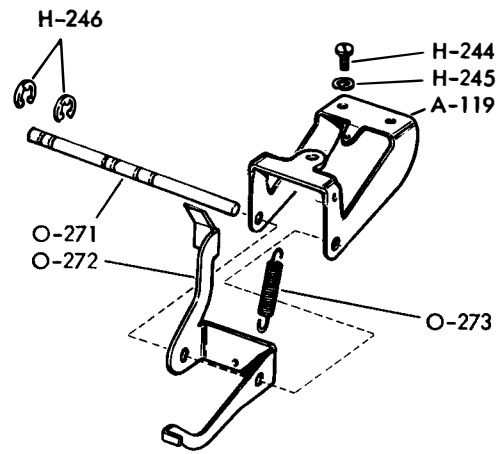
Keyboard MX-1114B/UG and Base NT-1443/UG, Carriage Return Mechanism
